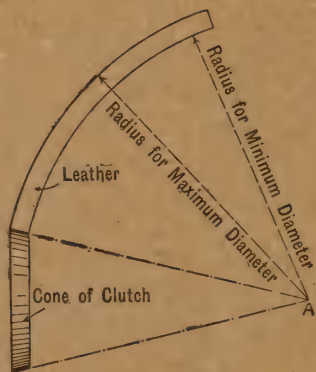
Method of Cutting Out Leather for Cone Clutch
